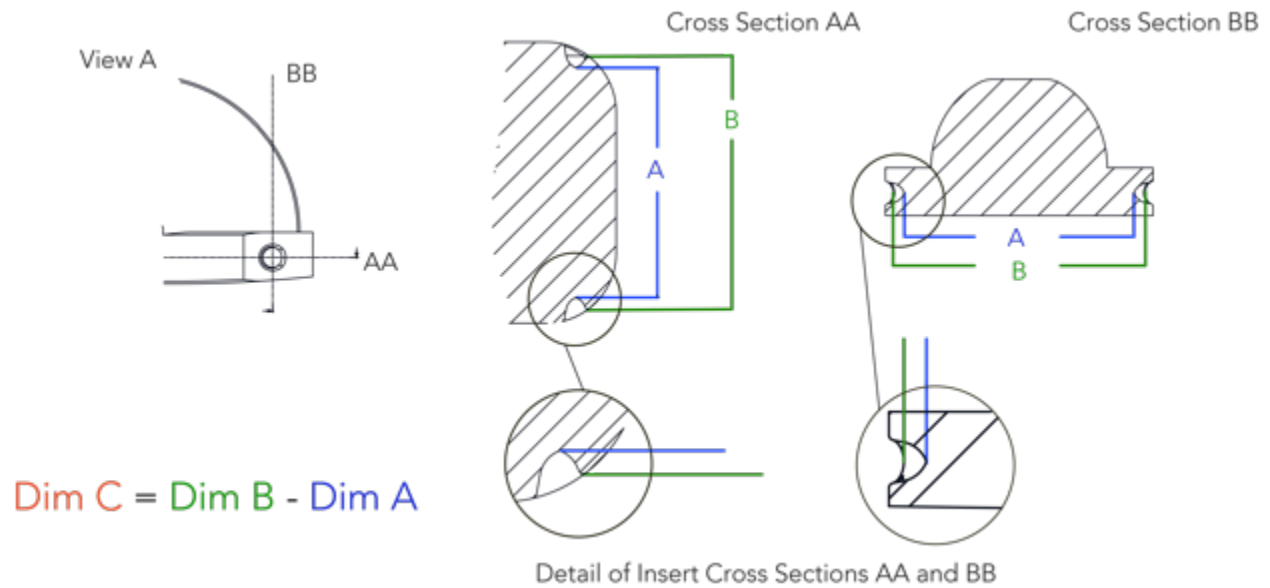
AT boot dimensions measured at the toe inserts. View (A) is looking at a boot toe from the side. Cross section (AA) is a horizontal cut through the plane of the insert and boot sole. Cross section (BB) is a cut through the vertical plane of the boot toe, the view is towards the boot toe.
